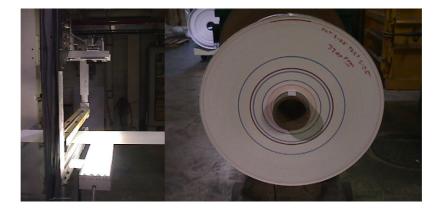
View of inspection assembly during run and a picture of the Accolade Gloss Roll with defect location marks.
